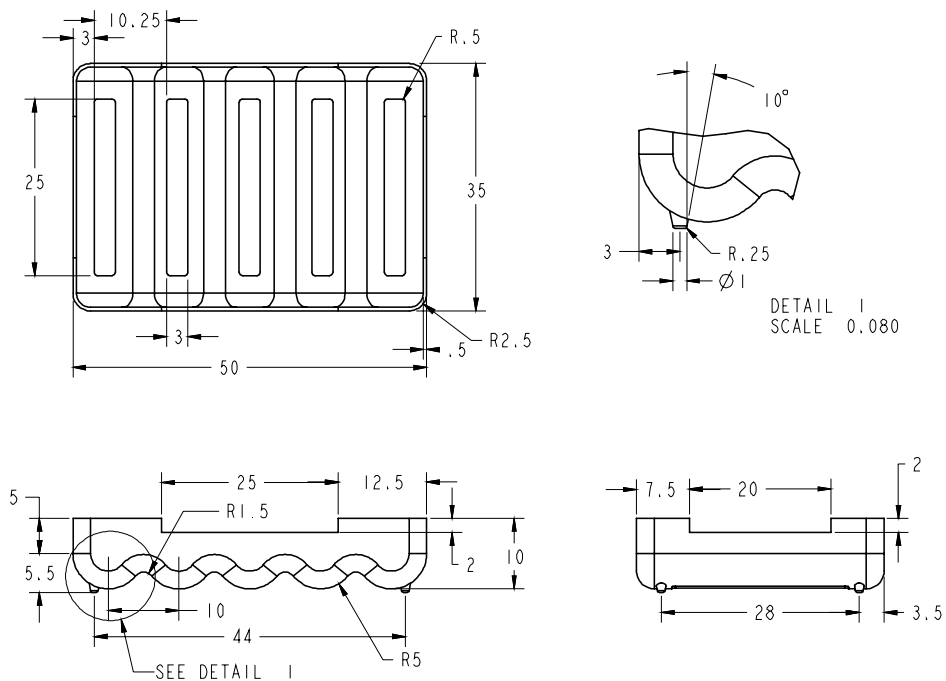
Top, sectioned front, right-side, and detail view of the soap case
